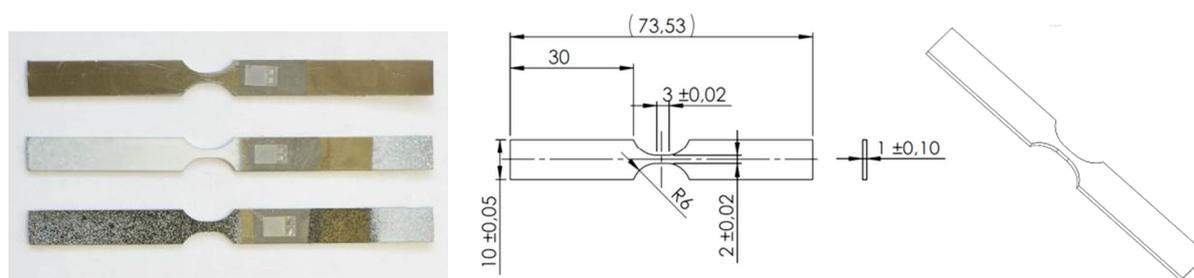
Left) M-TT specimen geometry with mounted strain gauge, right) modified M-TT specimen geometry
